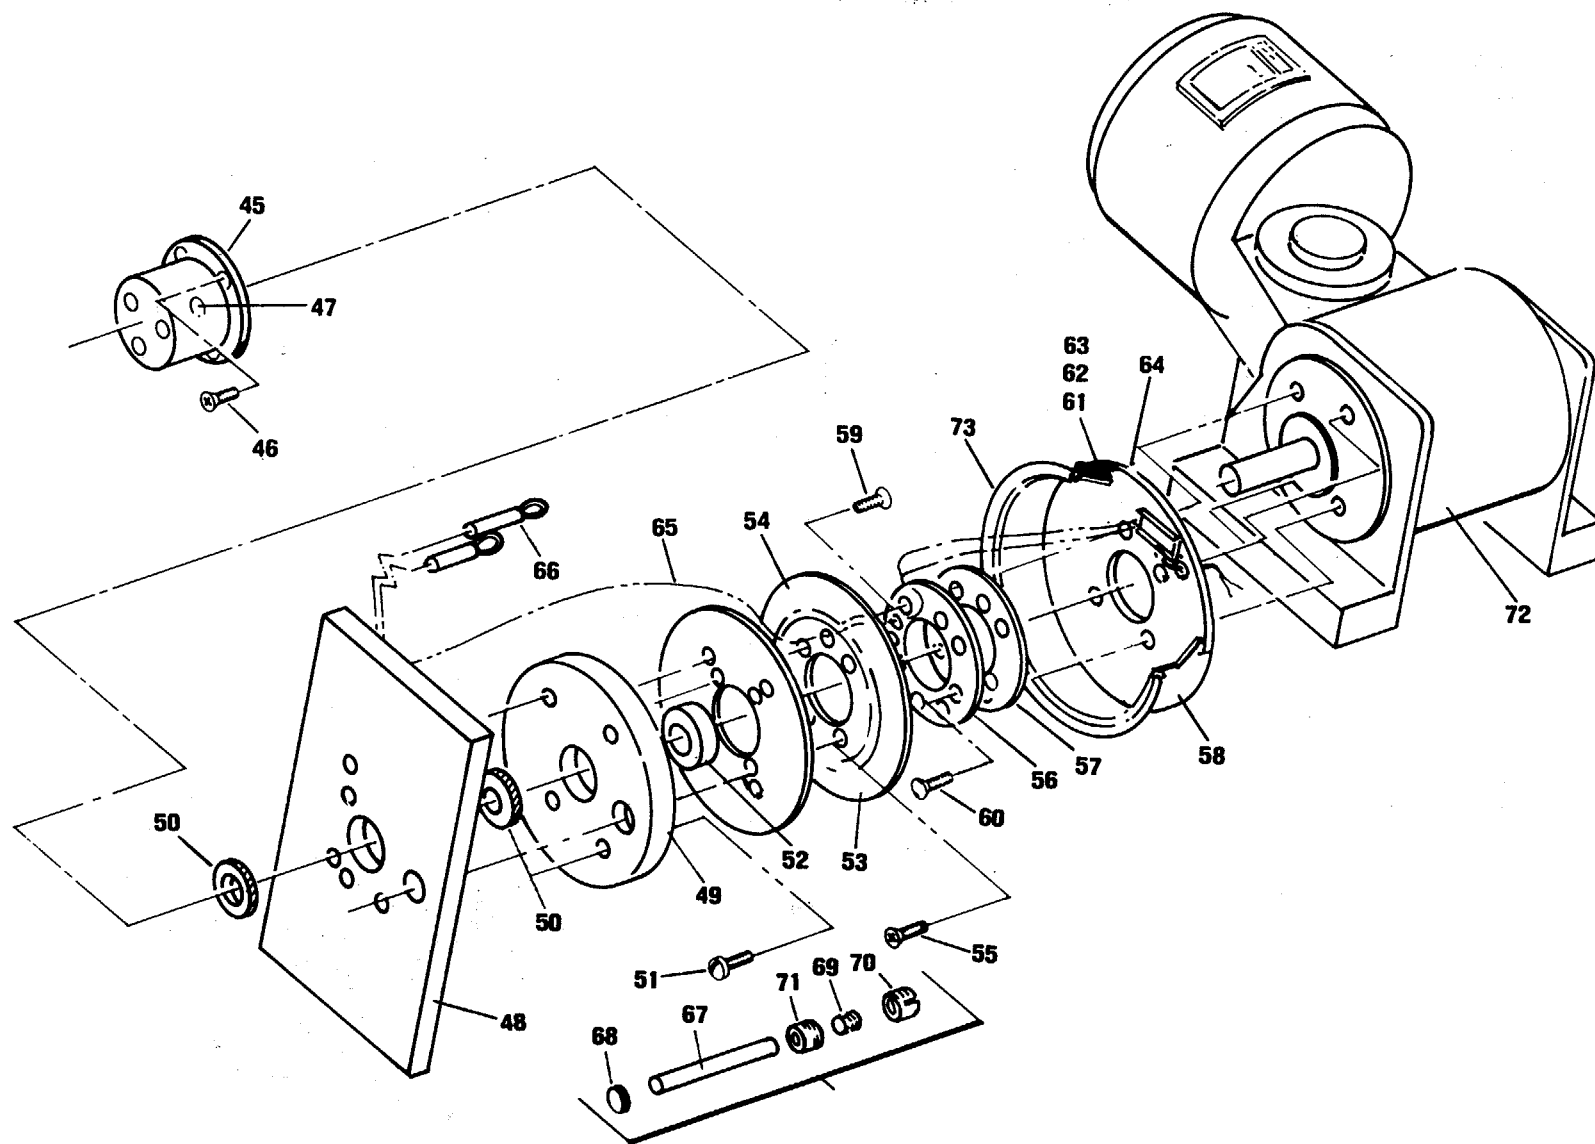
Gyro Tester Assembly (Sheet 2 of 3)
